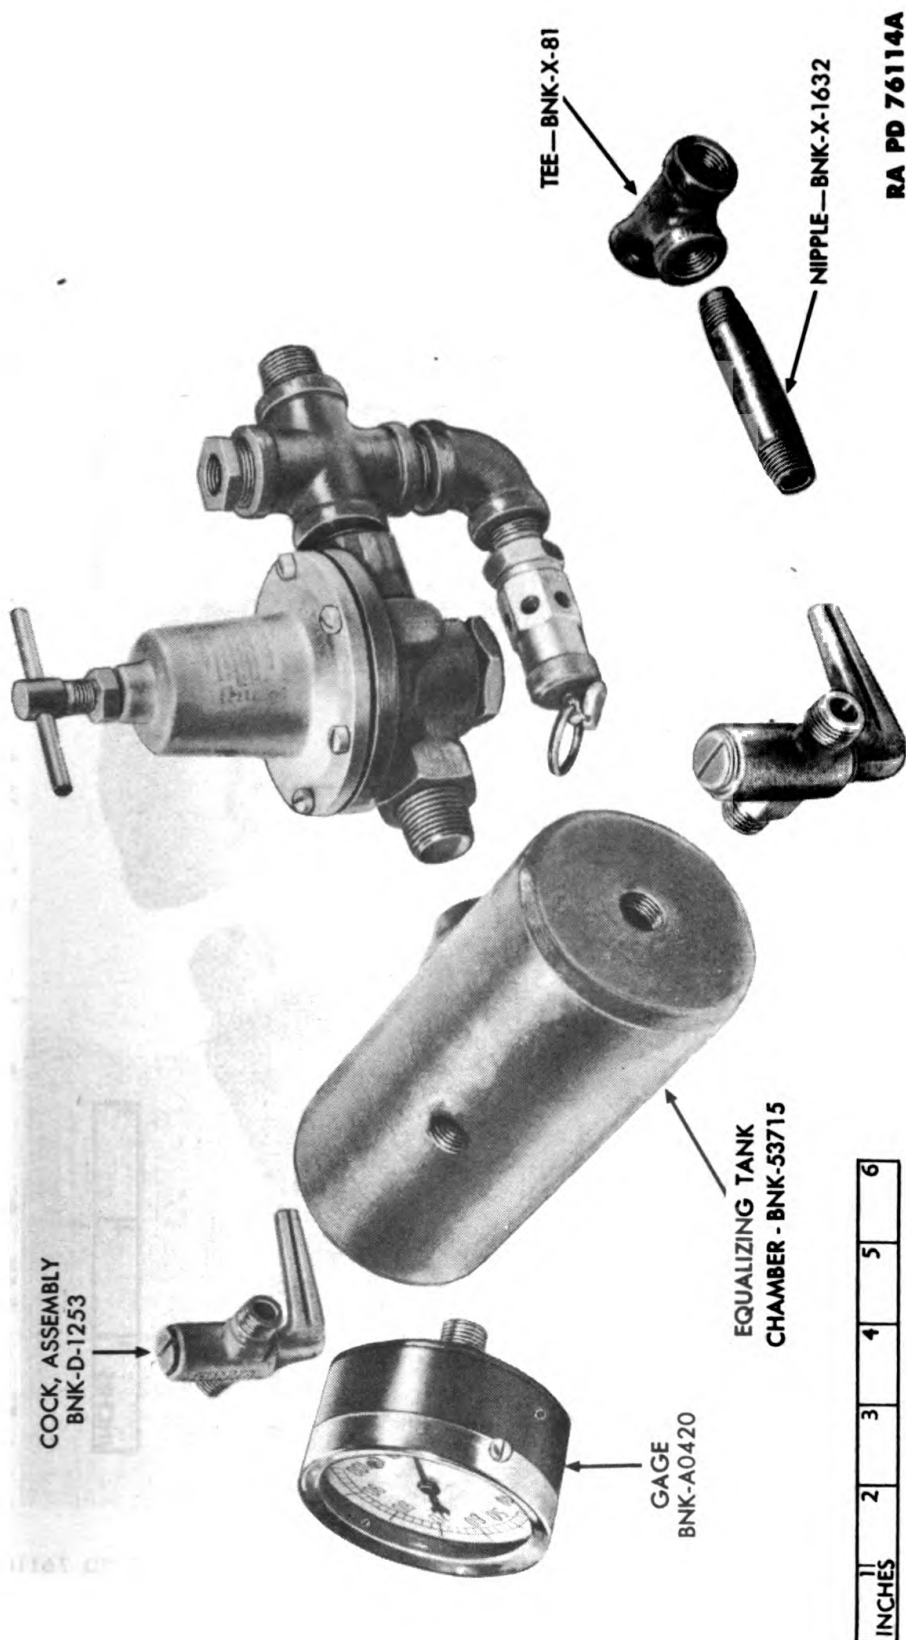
Equalizing Tank Pressure Gage, Regulator, and Fittings for Air Compressor
